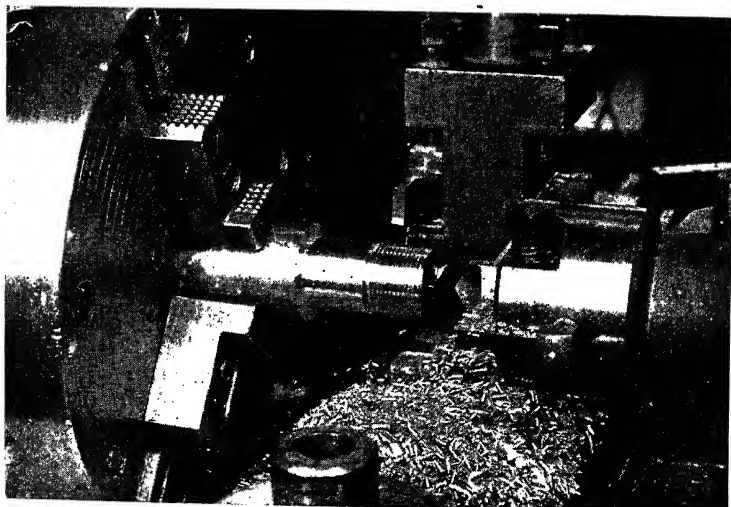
PRODUCTION OF SMALL TURNED COMPONENT ON A LIGHT CAPSTAN LATHE (3). Thread cut with Herbert die-box. Showing the box being withdrawn after the thread-cutting operation.
